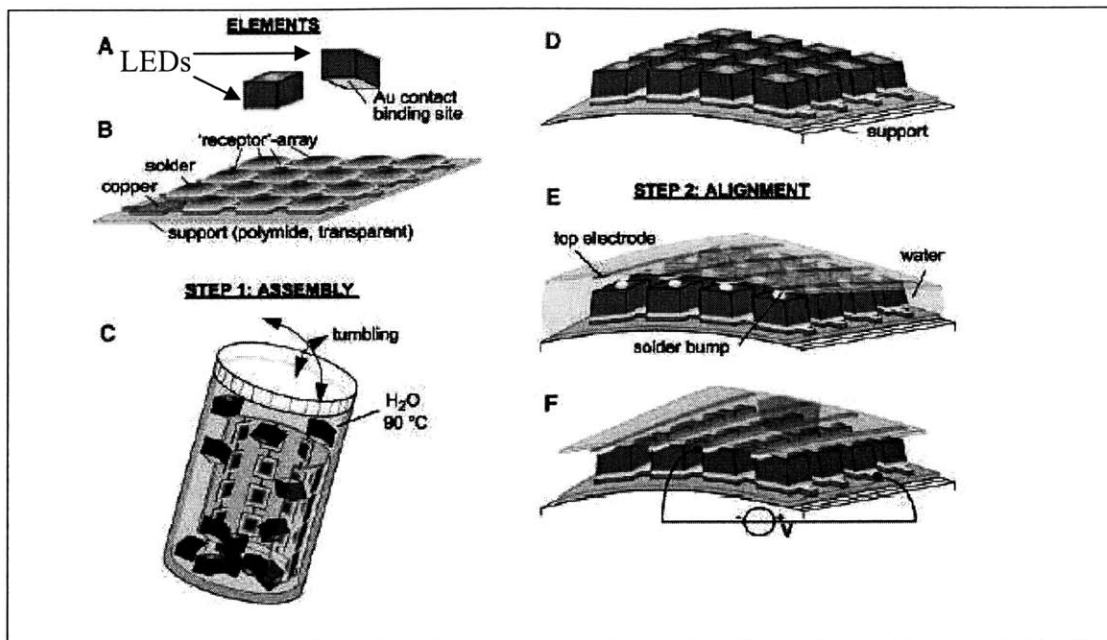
Self-assembly (using solder) demonstrated by the Whitesides' group [2]
